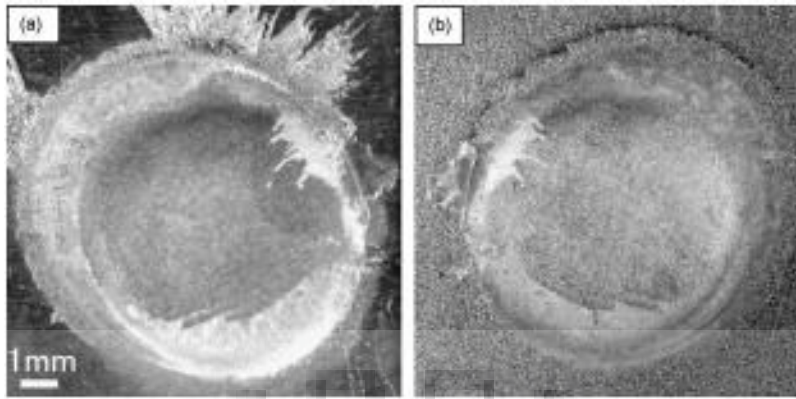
(a) A5052 side (b) SPCC side fracture surfaces of fractured A5052/SPCC joint (Qiu et al., 2009) [5].
